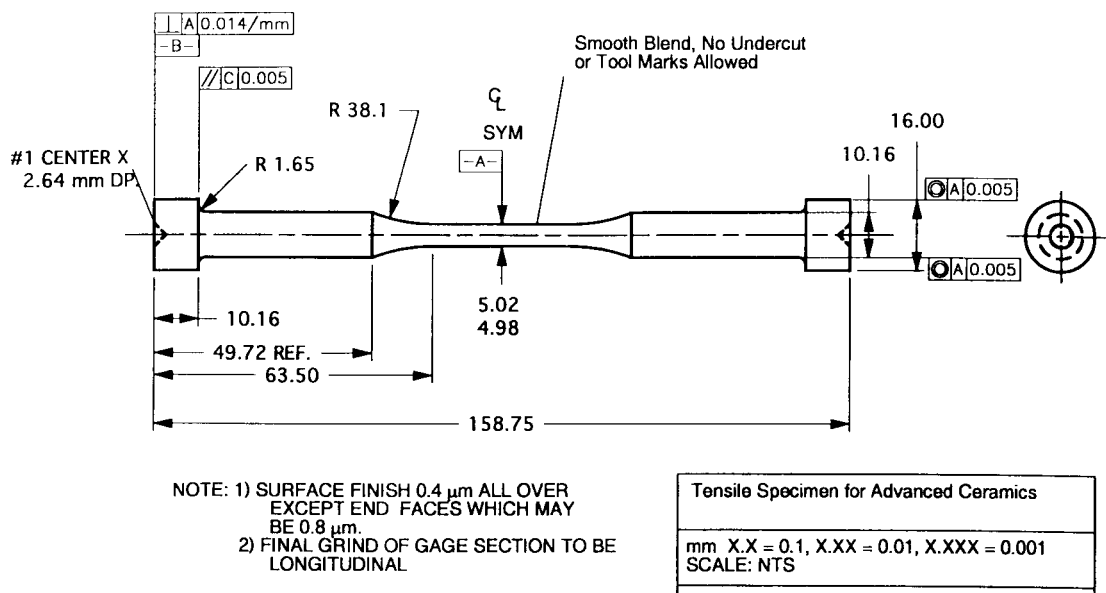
Example of a Cylindrical, Button-Head Tensile Specimen (10)
